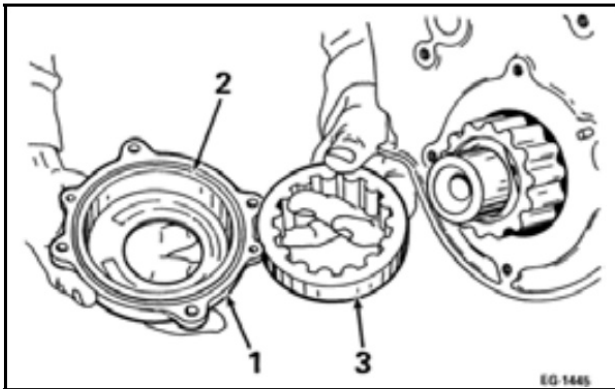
Removing Oil Pump Housing and Outer Gerotor Gear
